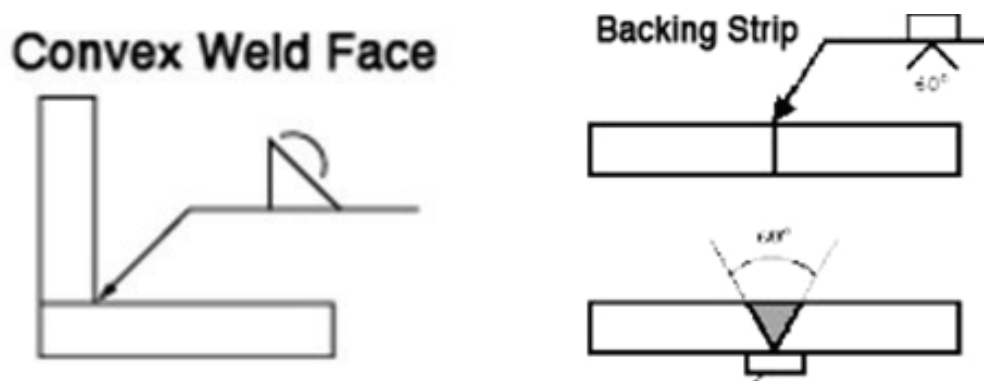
8: Symbols that indicate convex weld face and Backing strip
